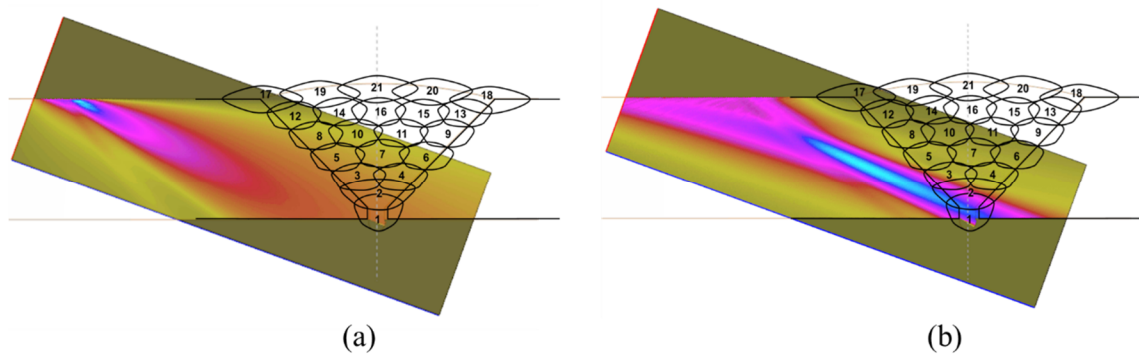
CIVA beam computation models of a 70° weld inspection using (a) an unfocused single-element probe and (b) a focused phased array probe with weld pass overlays [144]
